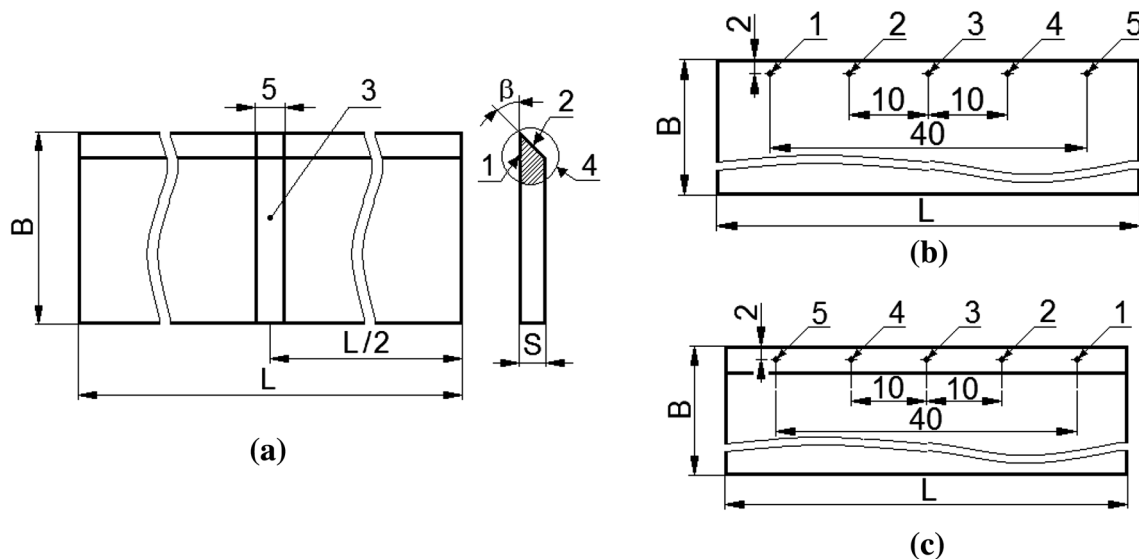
Wood milling tool: a dimensions, 1 rake face, 2 clearance face, 3 specimen, 4 area examined using microscope; b rake face, c clearance face; 1–5 location of hardness and roughness measurements
